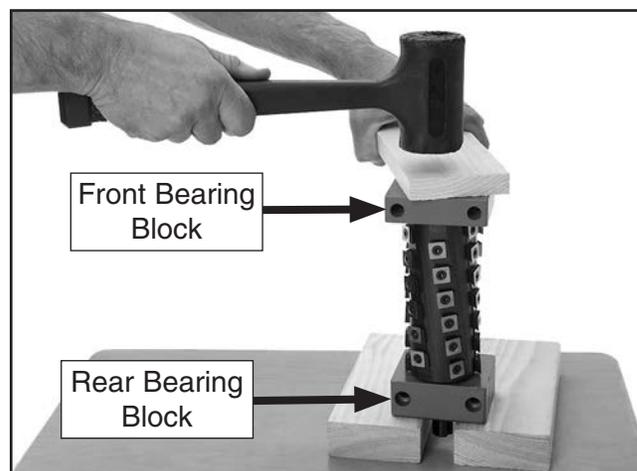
Example of seating rear bearing block onto spiral cutterhead (T27449 not shown).
